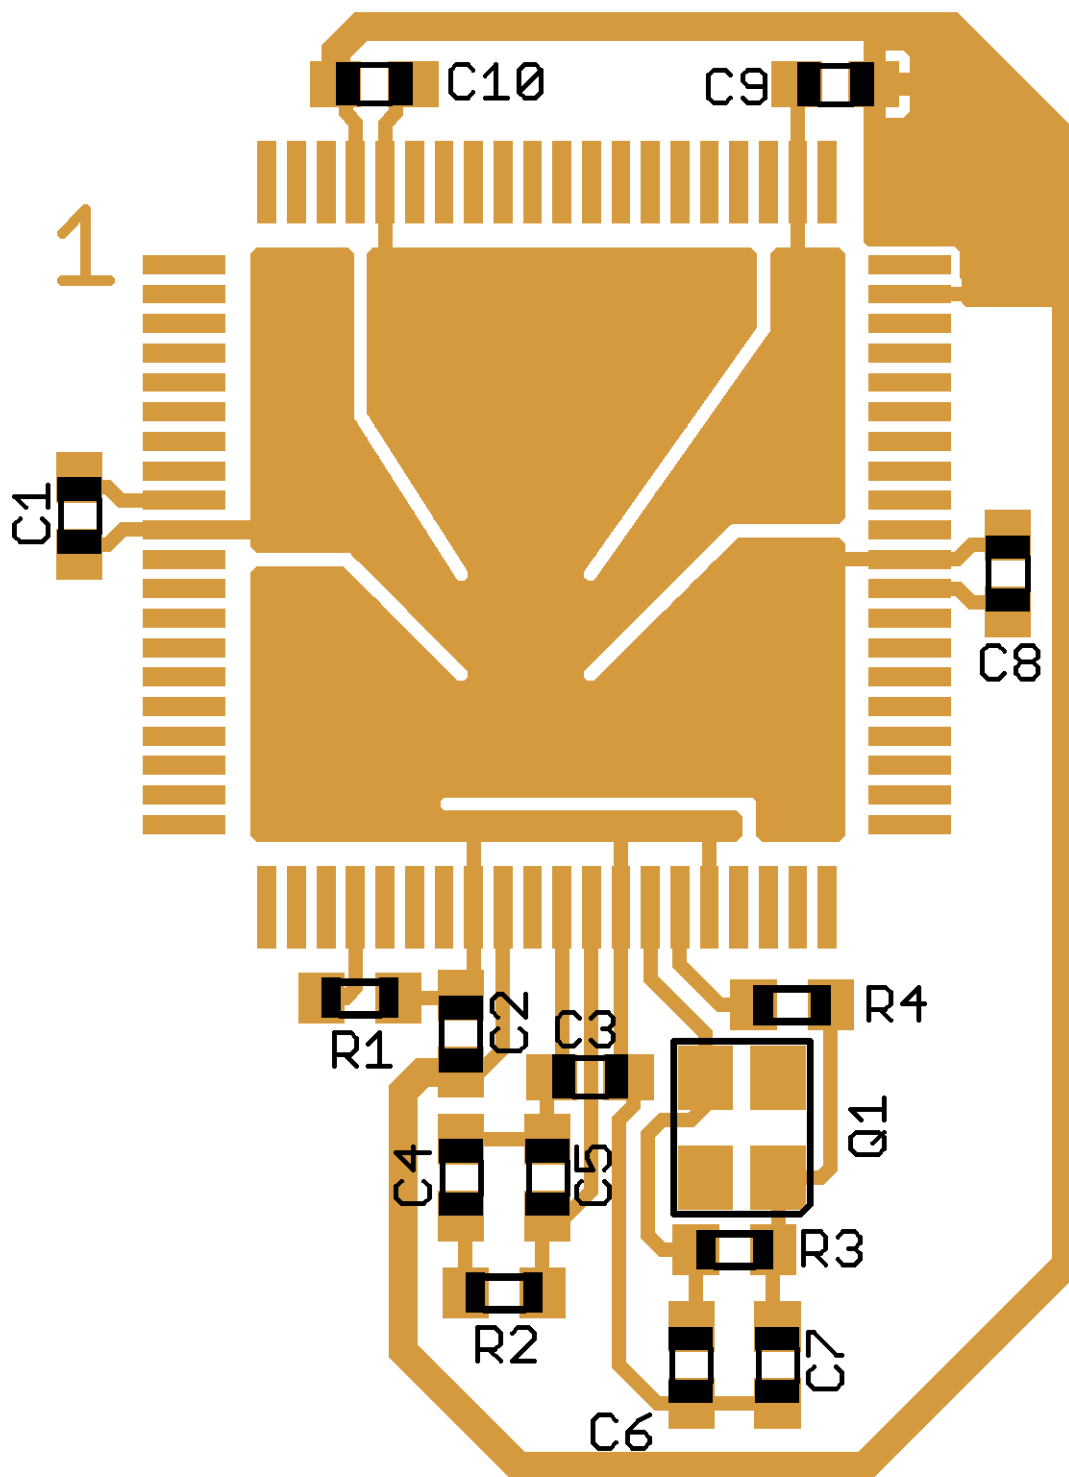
Recommended PCB Layout for 80QFP Pierce Oscillator
